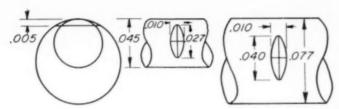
Wedge Penetrator Produces Geometrically Dissimilar Areas Because Length of Major Axis Is Influenced by Diameter of Wire Being Tested Even Though Rockwell Hardness Dial Readings Are Same for the Wires
